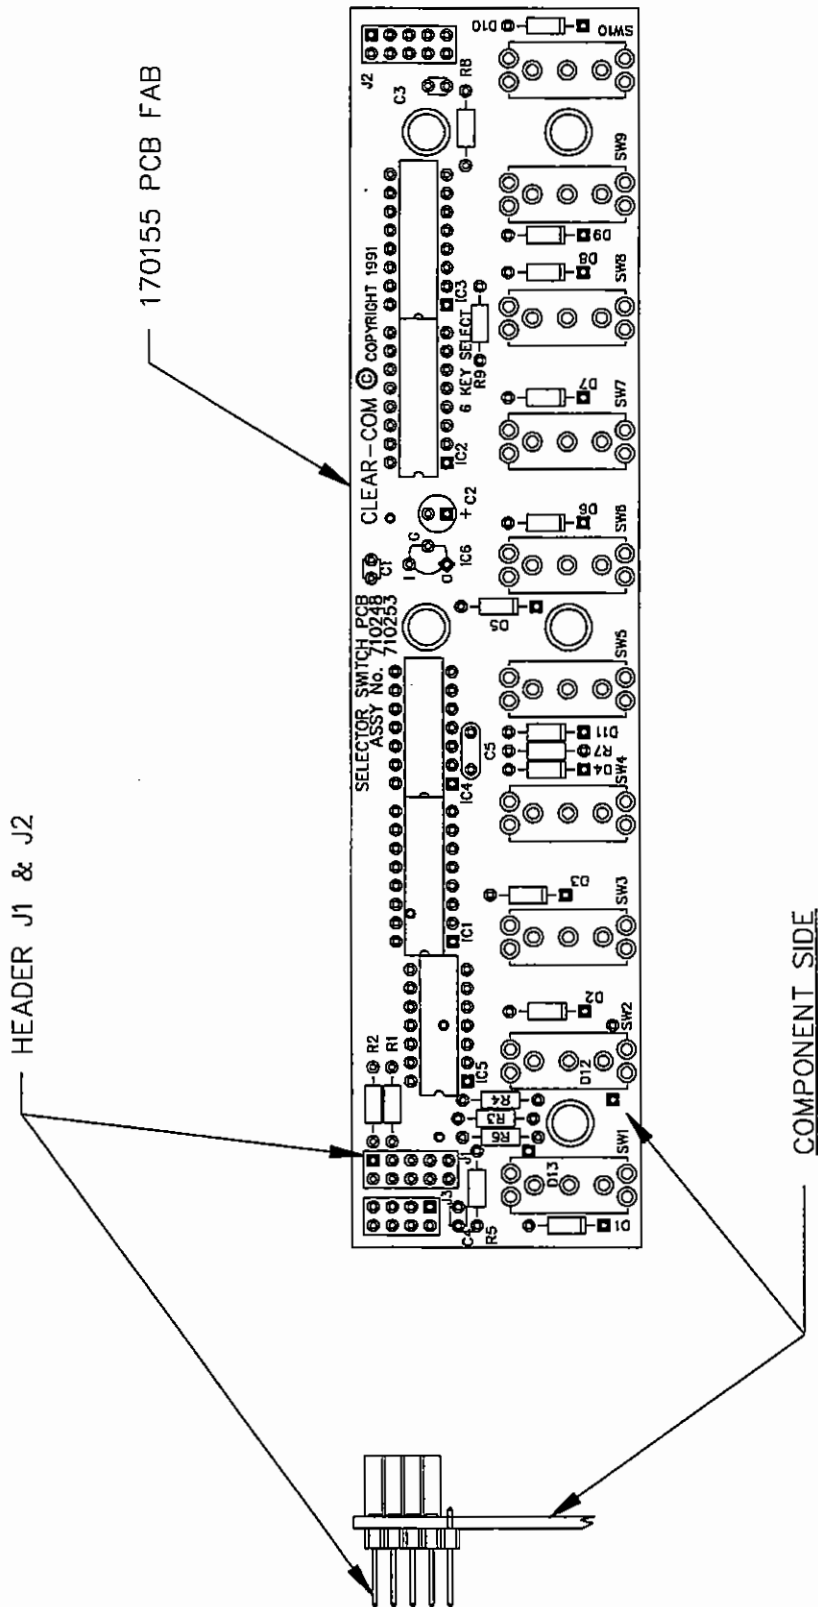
Assembly Drawing - XP-22 (20 Key Expansion Panel) Rev. A
